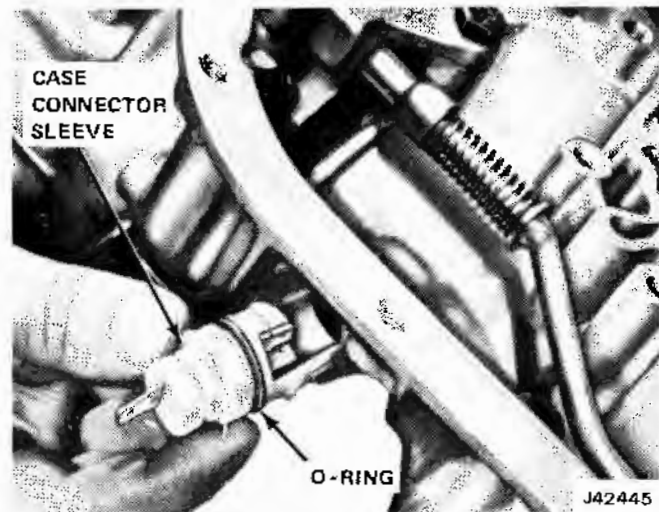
Removing-Installing Case Connector Sleeve and O-Ring Seal
